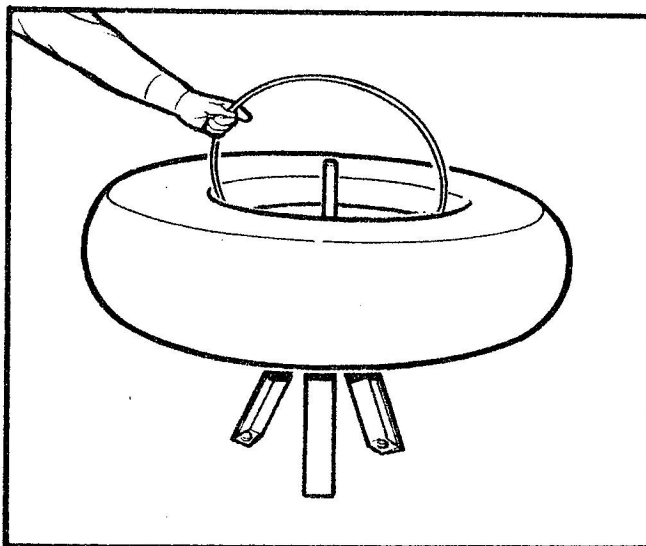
"O"-Ring Seal Used When Mounting Tubeless Tire
